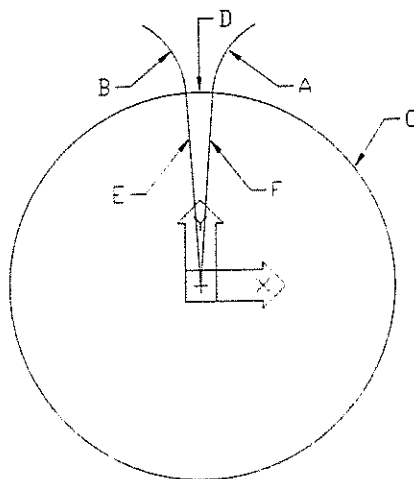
Layer Solid turned off, wires constructed on layer Wire
